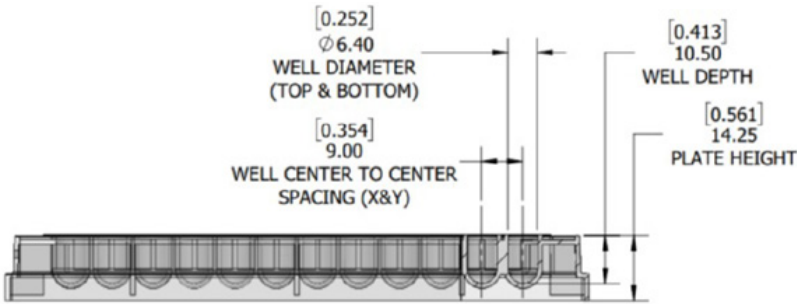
Plate and Well Dimensions of the 96 AFA-TUBE PS Plate (PN 520311).
